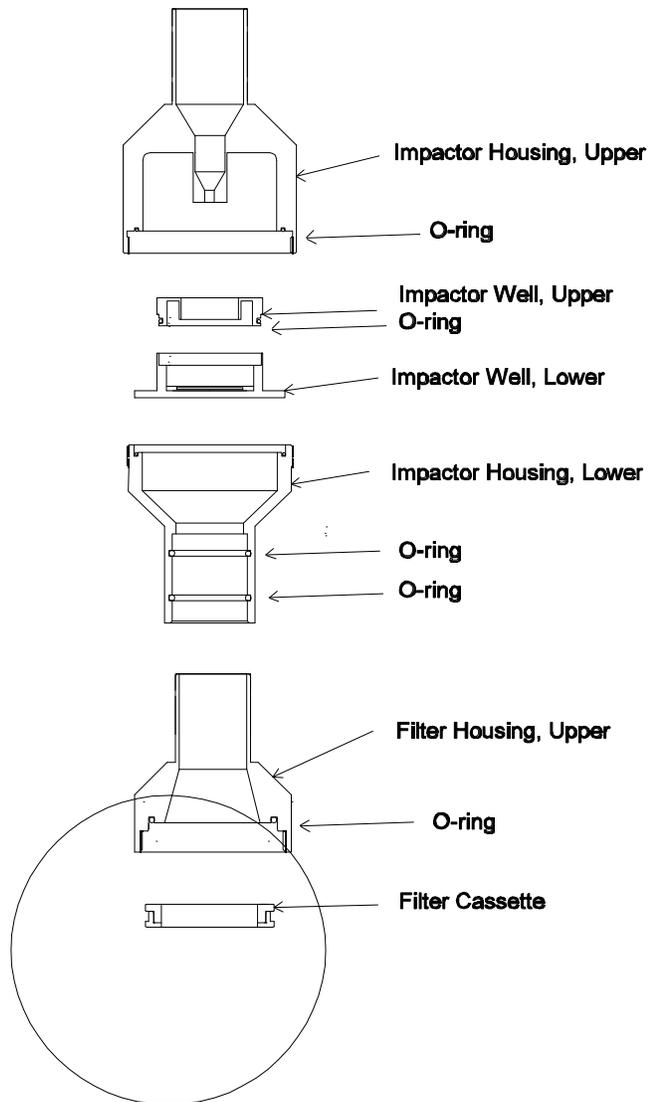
Exploded view of PM<sub>2.5</sub> impactor well (WINS) and filter holder assemblies.
